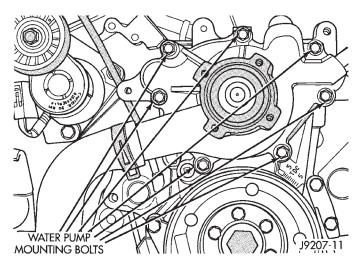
Water Pump Bolts—5.2L Engine—Typical
